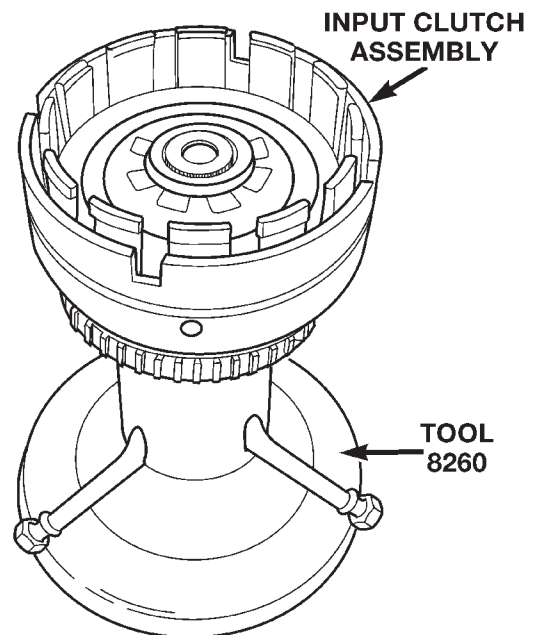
Input Clutch Assembly Mounted on Tool 8260
